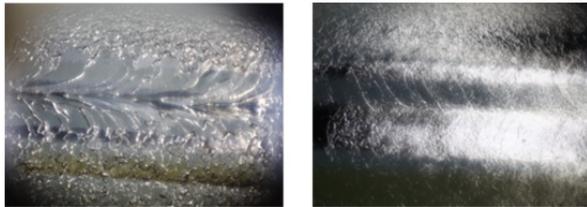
Optical inspection images of the equator weld seam on the RF surface; Cornell VEP (left), Ninja cathode type-I (right).
